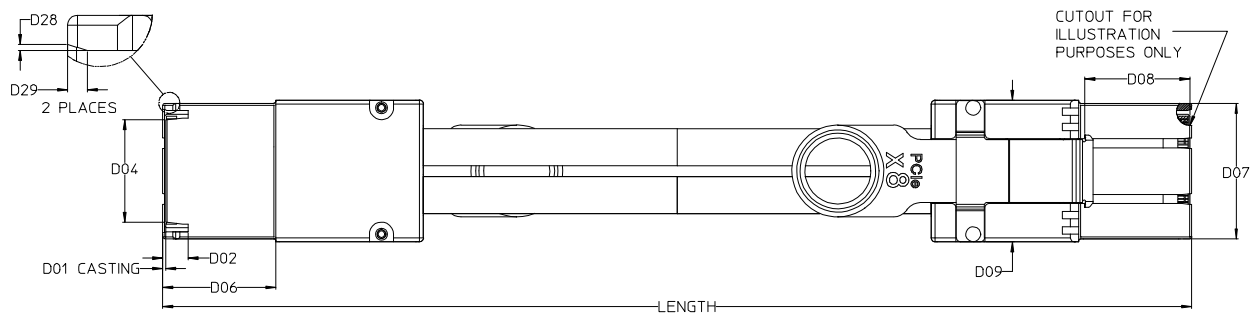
x8 Cable Assembly Top and Bottom Views
